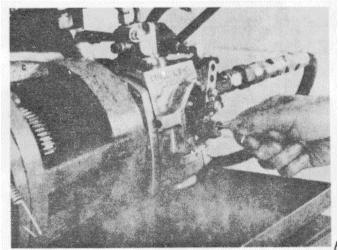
G-84. Setting Calibration Pressure with Throttle Fuel Adjusting Screw COMPARE CHECK POINT PRESSURE AFC STANDARD GOVERNOR. Compare check point pressure as follows:
